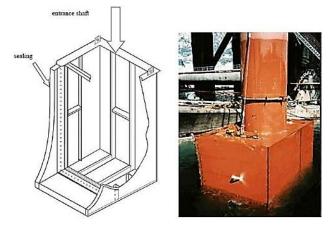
The Cofferdam Used in Welding Performed Under one Atmosphere Pressure[10]
